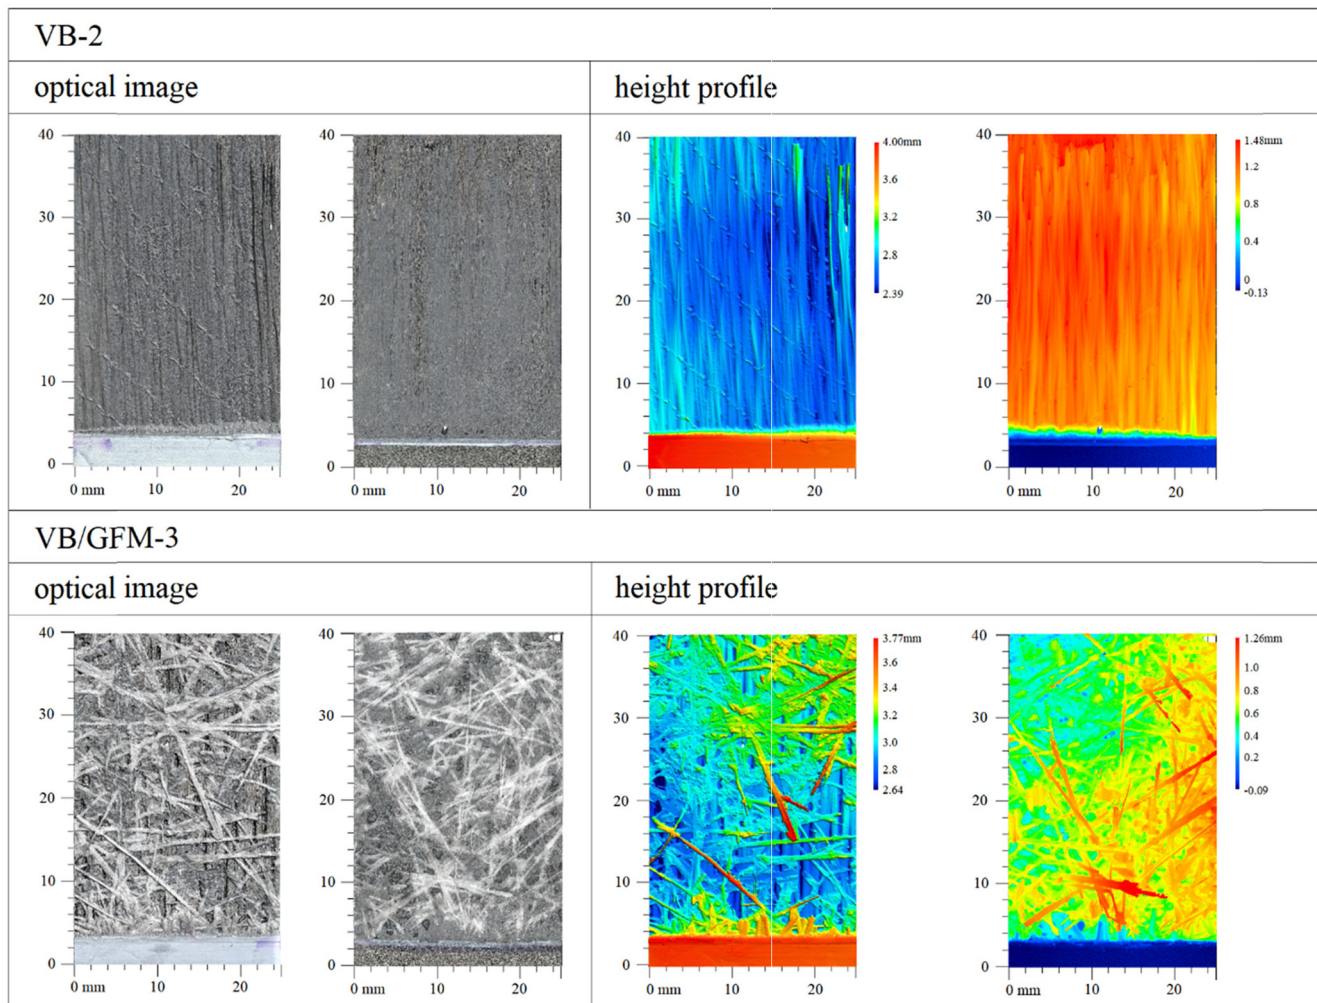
Representative fracture surfaces of specimens manufactured using vacuum bagging under 75% mode II fracture.
